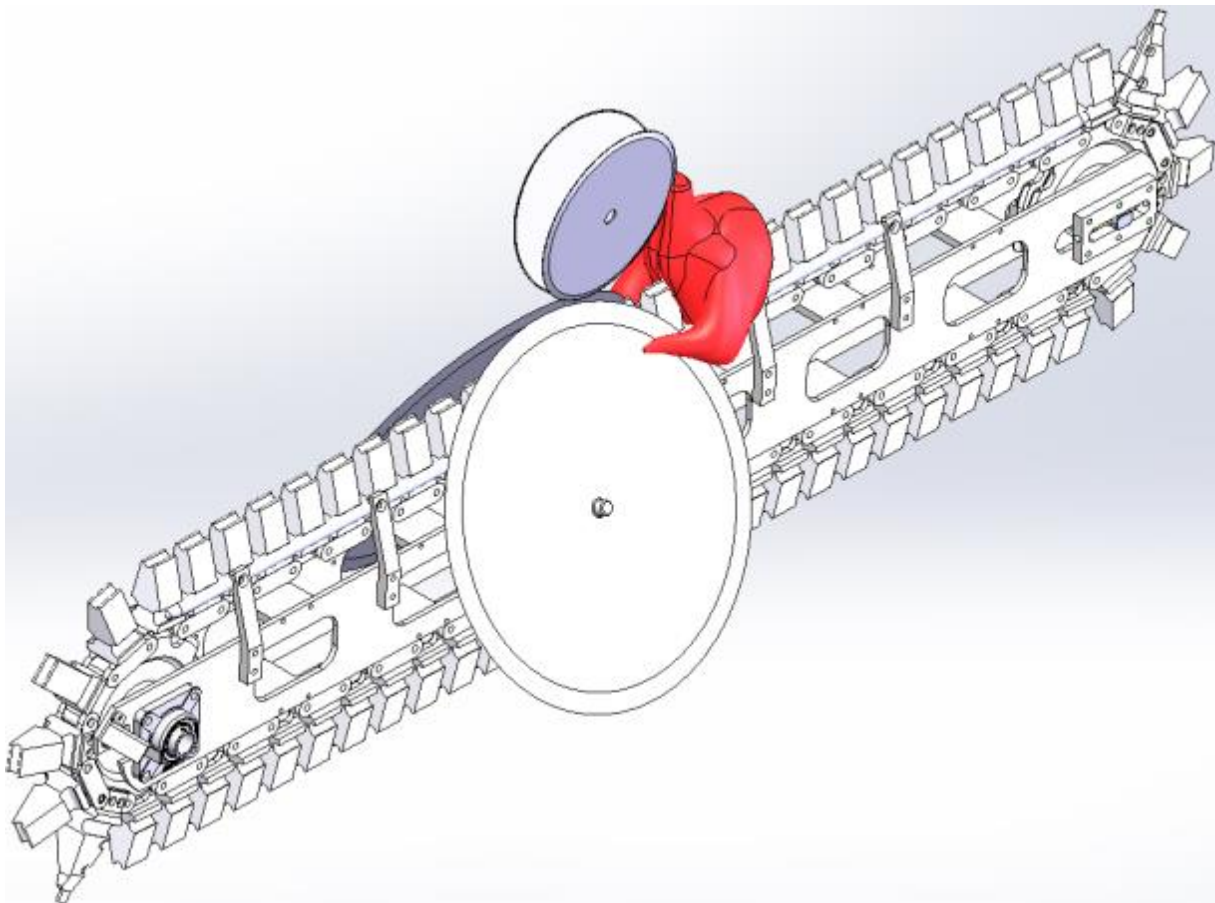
Lamb Forequarter Boneless System – CFO Machine with Robotic Further Processing
